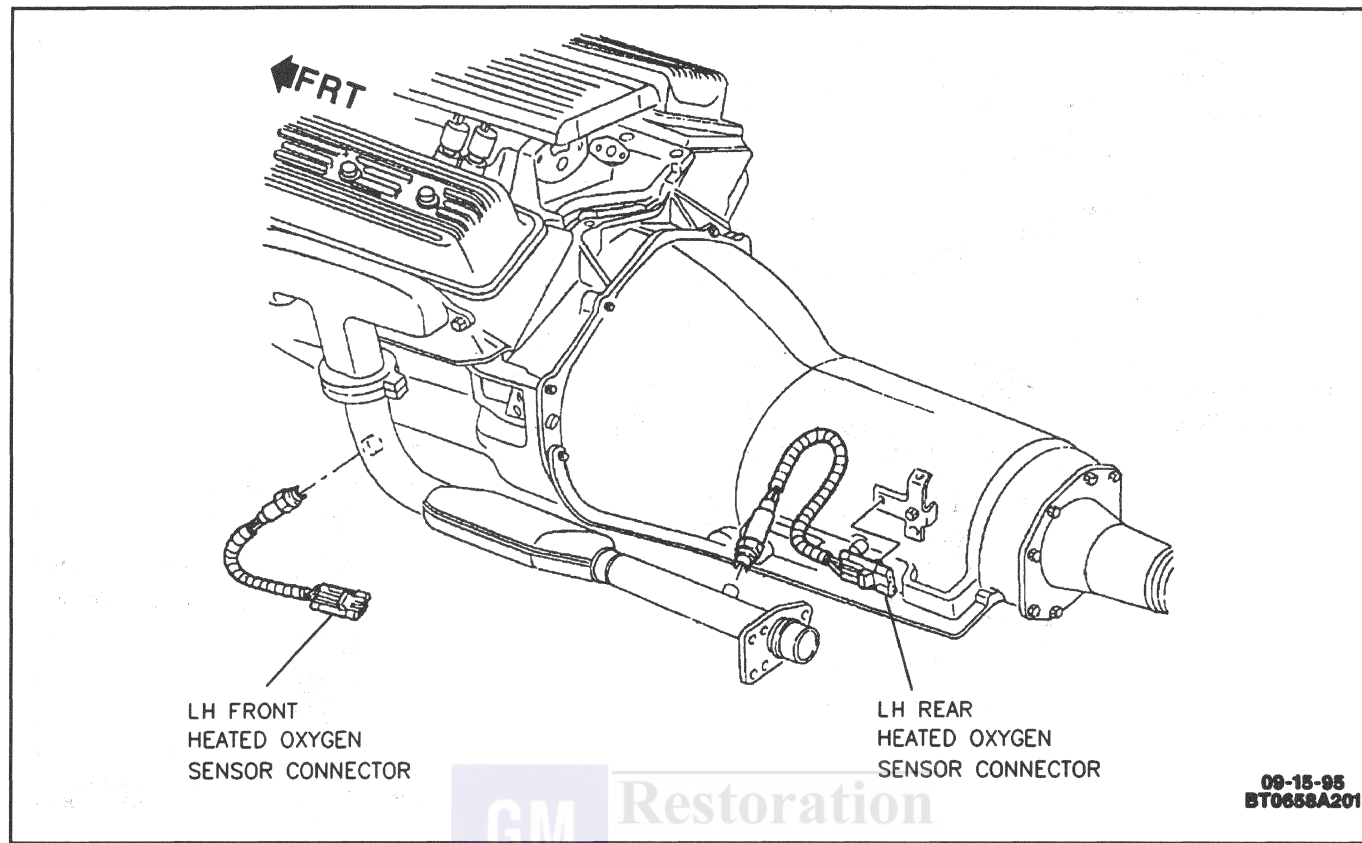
LH Front and Rear Heated Oxygen Sensors
